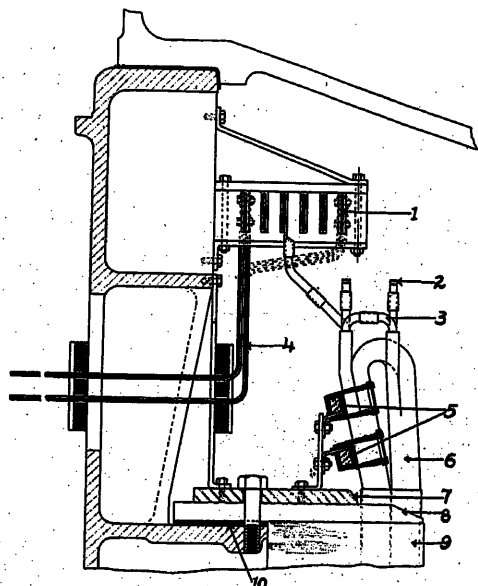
ARRANGEMENT OF STATOR COIL CONNECTIONS AND COIL BRACING RINGS
